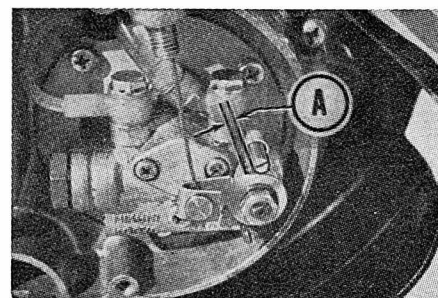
When the throttle is wide open, clearance (A) should be 0.04 inch (1MM) between control lever and stop pin.
